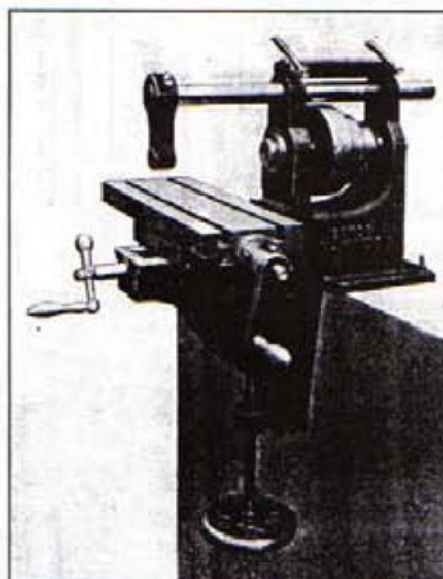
Simple horizontal milling machine by Bonds, 1934.
